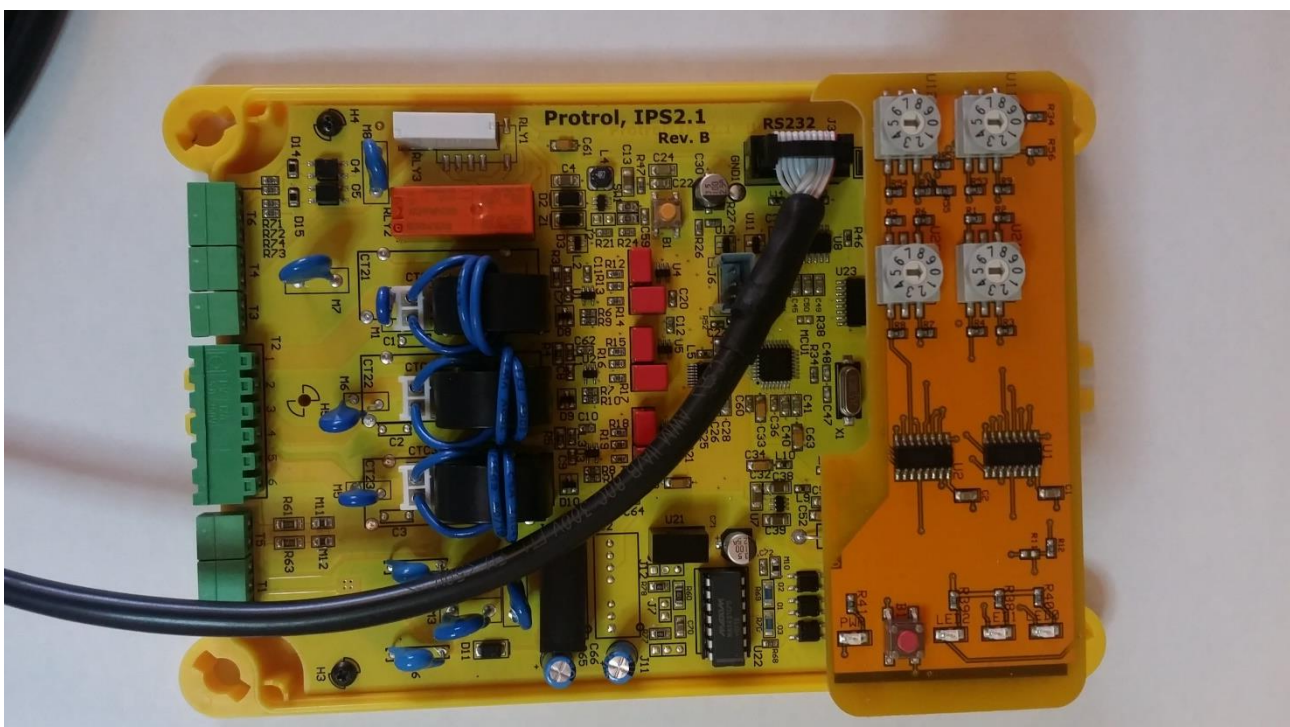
The RS232 adapter cable is attached to the RS232 socket in the upper left corner of the Main PCB.
